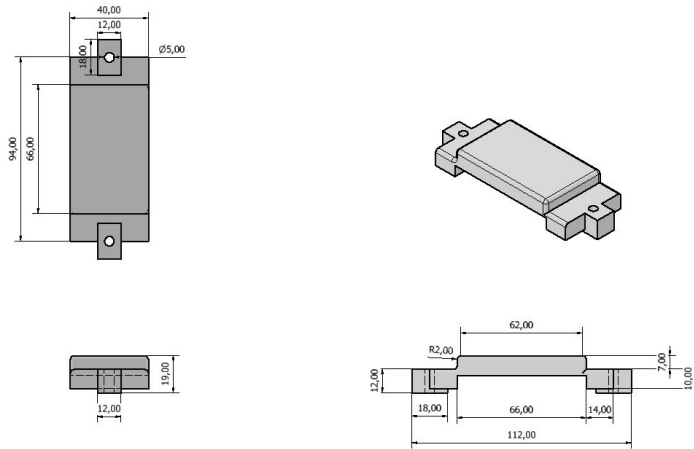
18650 battery case: front, end, and top views with dimensions. Authors' own CAD.
